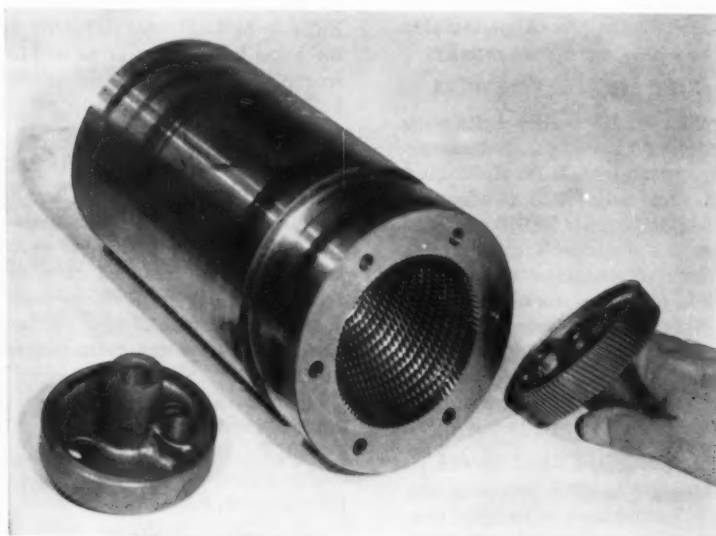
Solid, high-speed steel hollow broach (center) used on machine illustrated in Fig. 1 to broach teeth of gear shown at right
